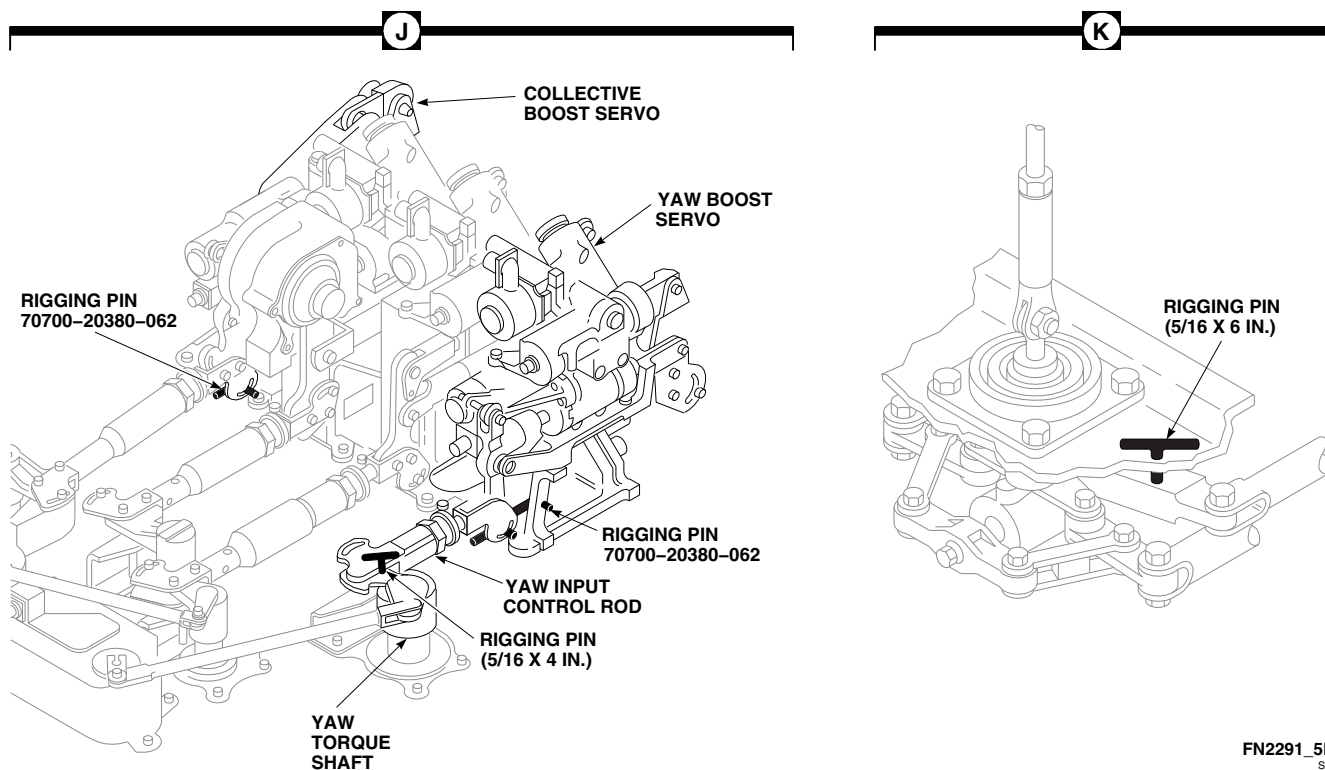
TAIL ROTOR SYSTEM RIG CHECK (SHEET 5 OF 5)
